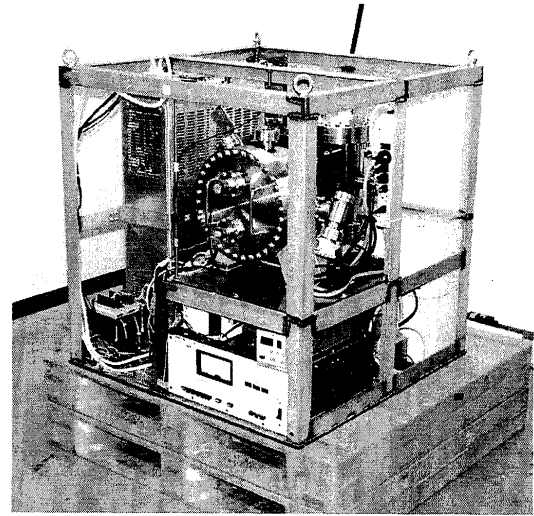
Electron beam welding apparatus for use in microgravity environment. 1: high voltage power supply, 2: vacuum chamber, 3: vacuum pump control system, 4: battery, 5: system controller
